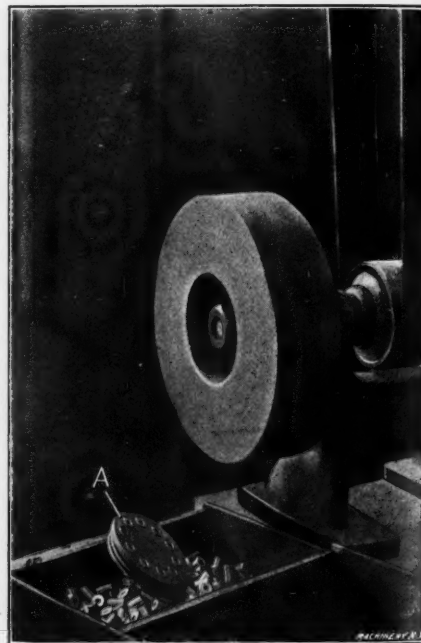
Jig in which Bearings are held while Burrs are being removed by Grinding
